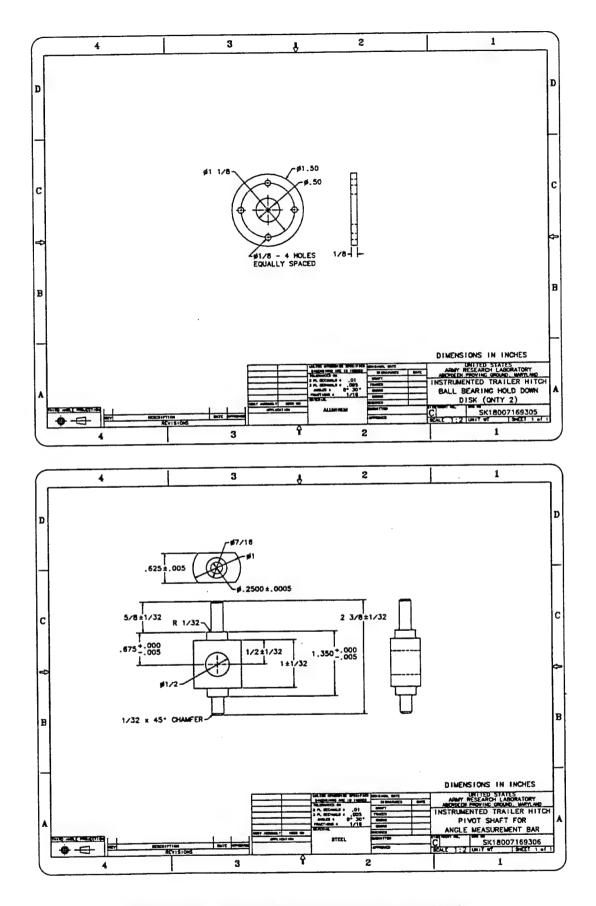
Bearing Hold-Down and Pivot Shaft.
